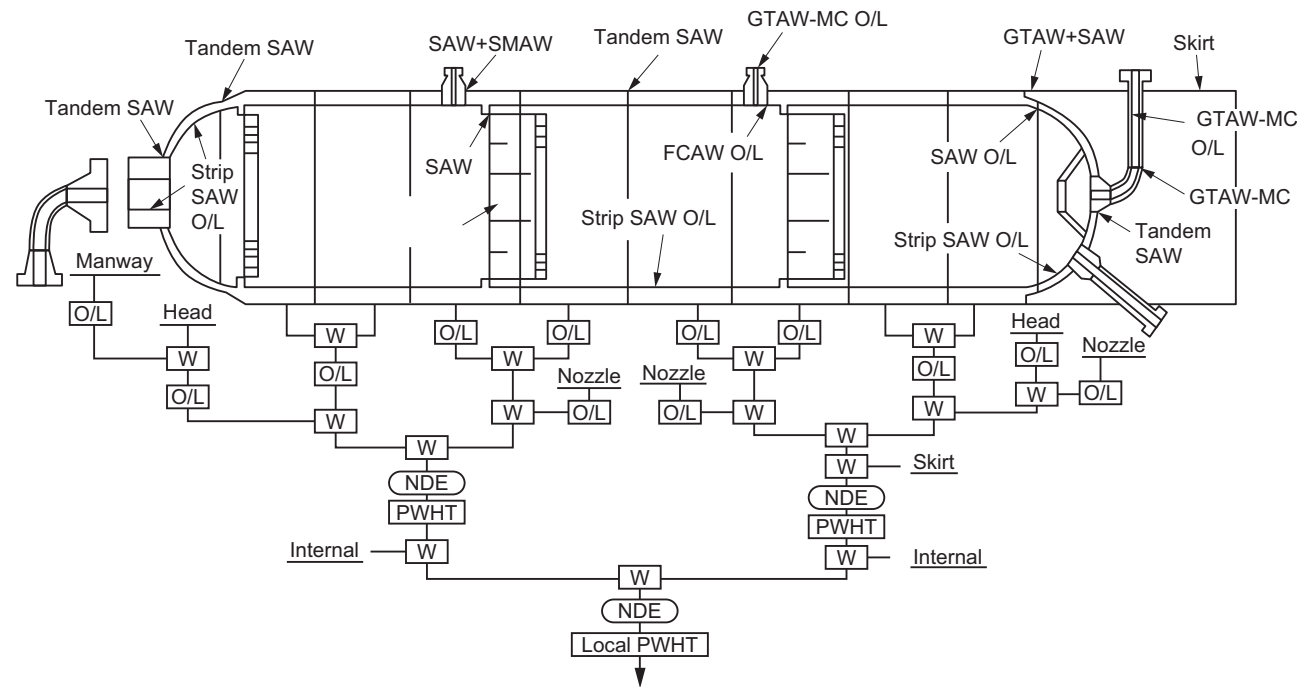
shows a fabrication procedure for reactor pressure vessels. Stainless steel overlay welding of the internal surfaces of the Cr-Mo shell ring forgings is carried out on a single ring forging or two ring forgings joined by circumferential welding.
